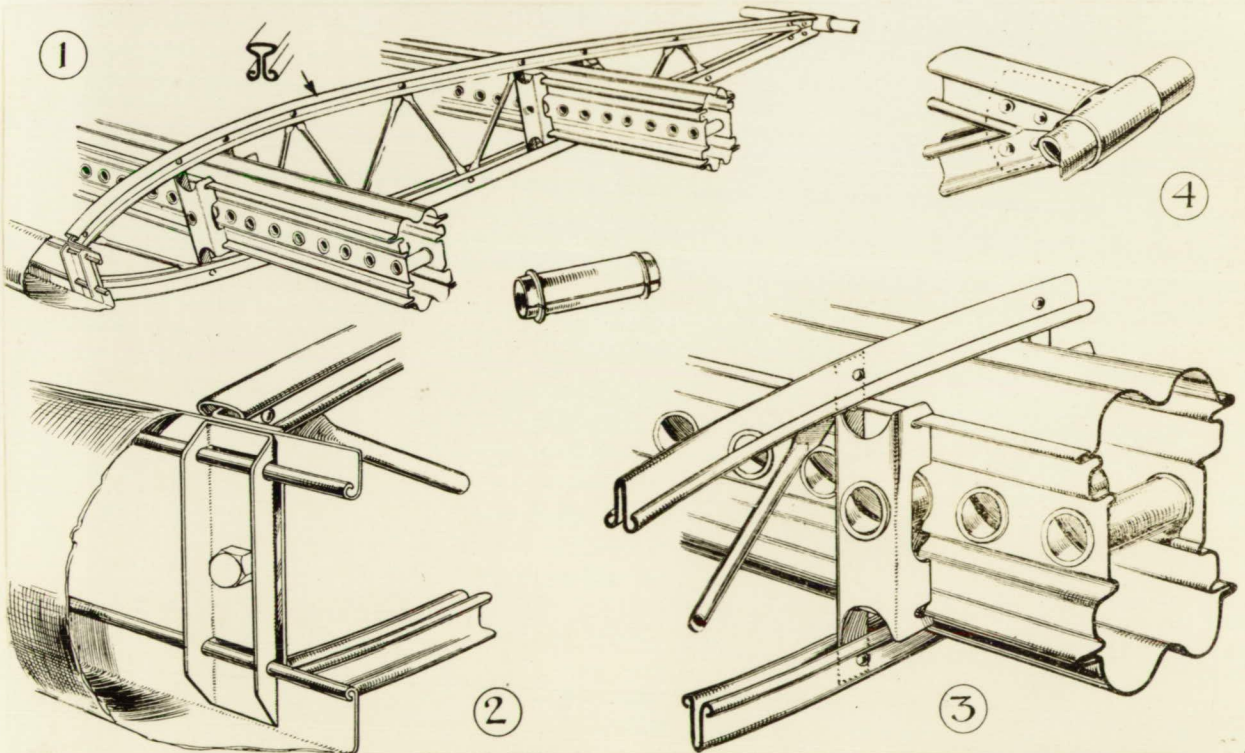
Constructional details of the wings. (1) General view showing main spars and a rib. (2) Attachment of metal leading edge to rib. (3) Attachment of rib to main spar. (4) Attachment of tubular trailing edge to rib.
